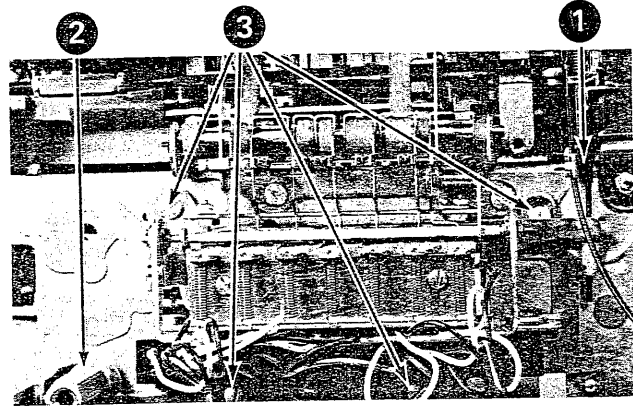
Print-Magnet-Assembly Removal (Steps 1-4)
